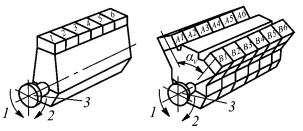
Sense of crankshaft rotation: 1 -counter-clockwise; 2 -clockwise; 3 -driving shaft flange
